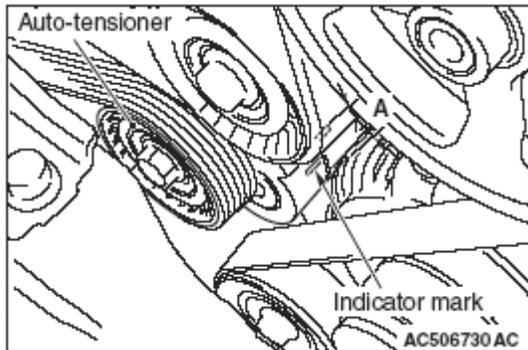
Identifying Indicator Mark On Auto-Tensioner
